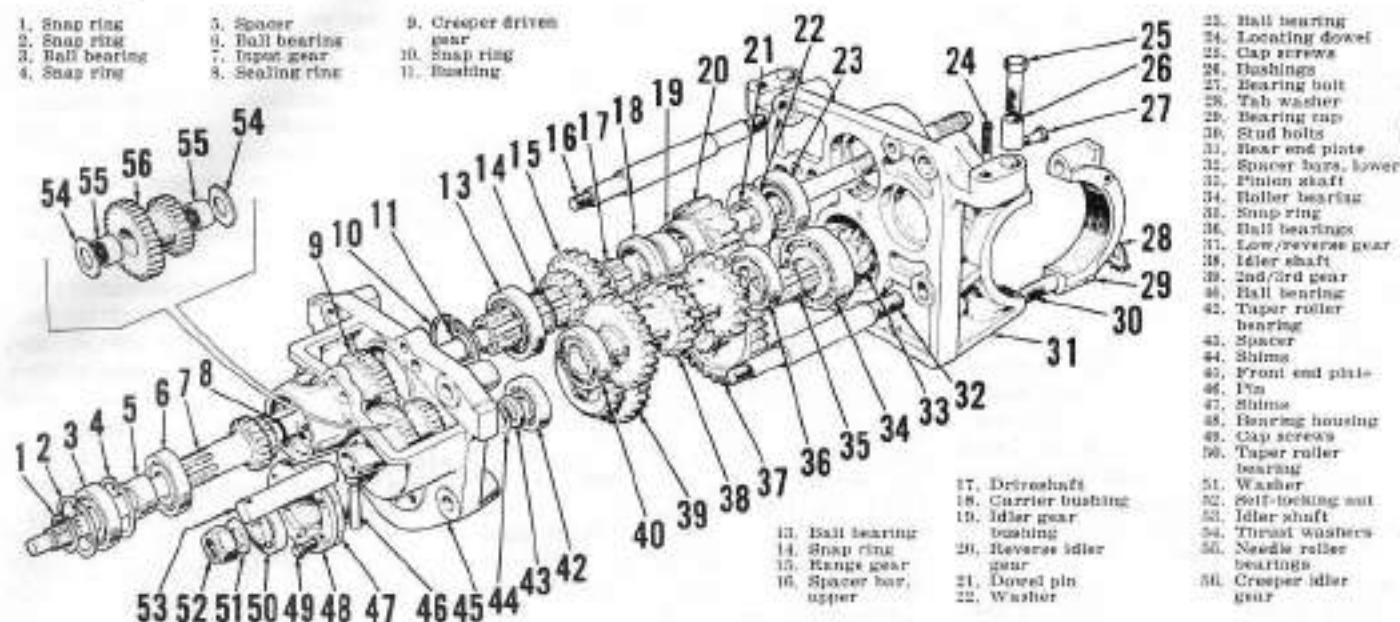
Exploded view of model 770 transmission assembly. Shift rails are carried in bores of front (45) and rear (31) transmission end plates; refer to Fig. 103 for view showing shift rails and forks. The end plate retaining cap screws (25) seat on bushings (26) allowing the transmission to float. Overtightening the cap screws will crush the bushings causing transmission to be held rigidly, resulting in excessive gear noise. Note "Livedrive" (dual clutch) model is shown.
